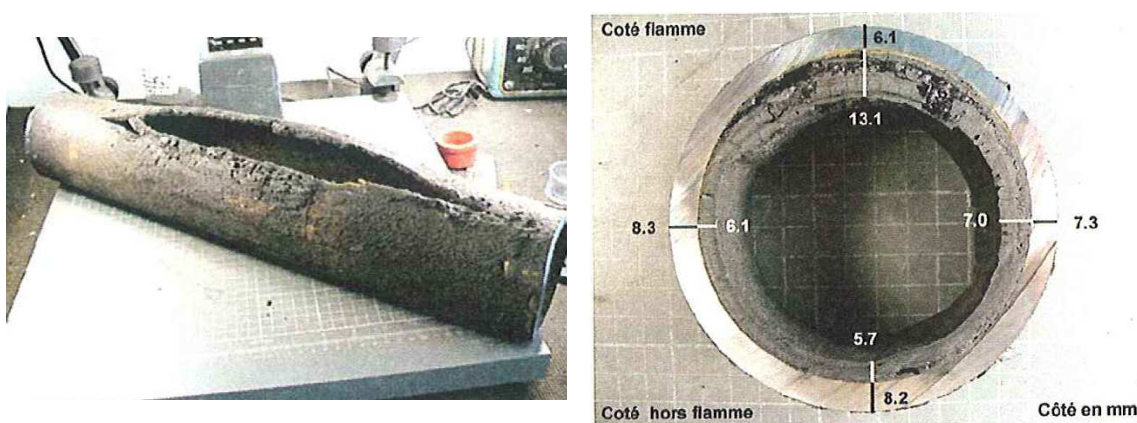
Ruptured shock tube section and coke layer near the fissure [60]
